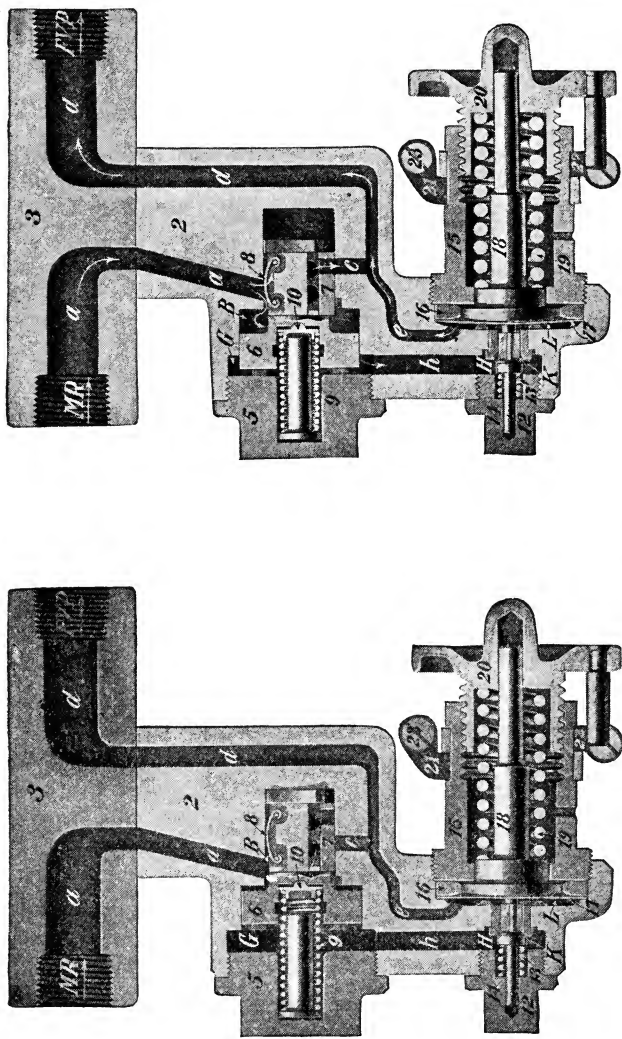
,007 and 2,008.—Westinghouse B-6 feed valve. Fig. 2,007 closed position; fig. 2,008, open position. Connections: M R, main reservoir pipe; FVP, feed valve pipe. Parts: 2, valve body; 3, pipe bracket; 5, cap nut; 6, supply valve piston, 7, supply valve; 8, supply valve spring; 9, piston spring; 10, piston spring tip; 12, regulating valve; 13, regulating valve spring; 14, regulating valve cap; 15, spring box; 16, diaphragm ring; 17, diaphragm; 18, diaphragm spindle; 19, regulating spring; 20, regulating hand wheel; 21, upper stop; 22, lower stop; 23, stop screw. The distinguishing feature of this type of feed valve is the duplex adjusting arrangement by which it eliminates the necessity of the two feed valves in high and low pressure service. The spring box, 15, has two rings encircling it, which are split through the lugs marked 21 and 22, in the diagram, and which may be secured in any position by the screw 23. The pin forming part of adjusting handle 20, limits the movement of the
